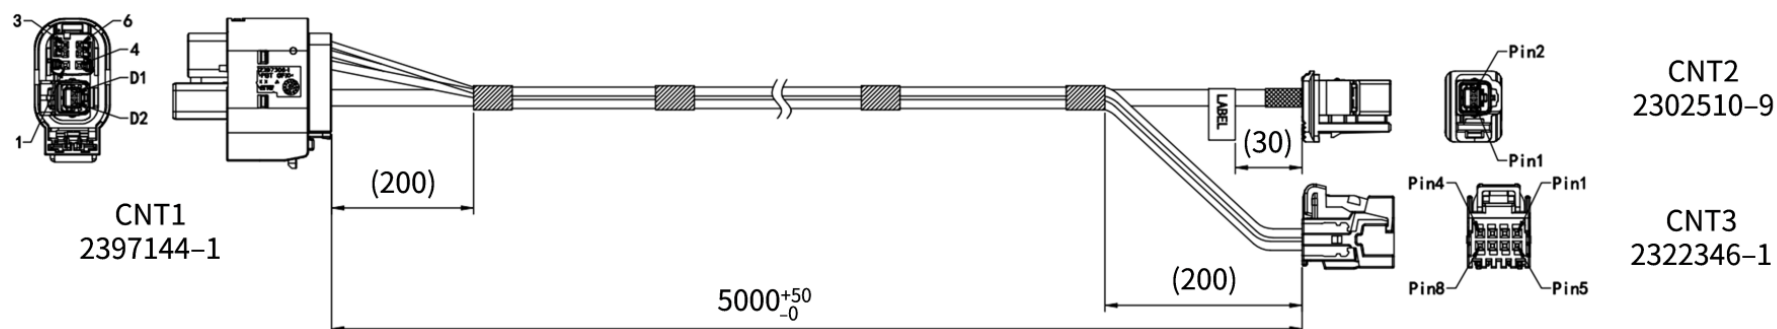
Cable assembly between lidar and connection box (unit: mm)
